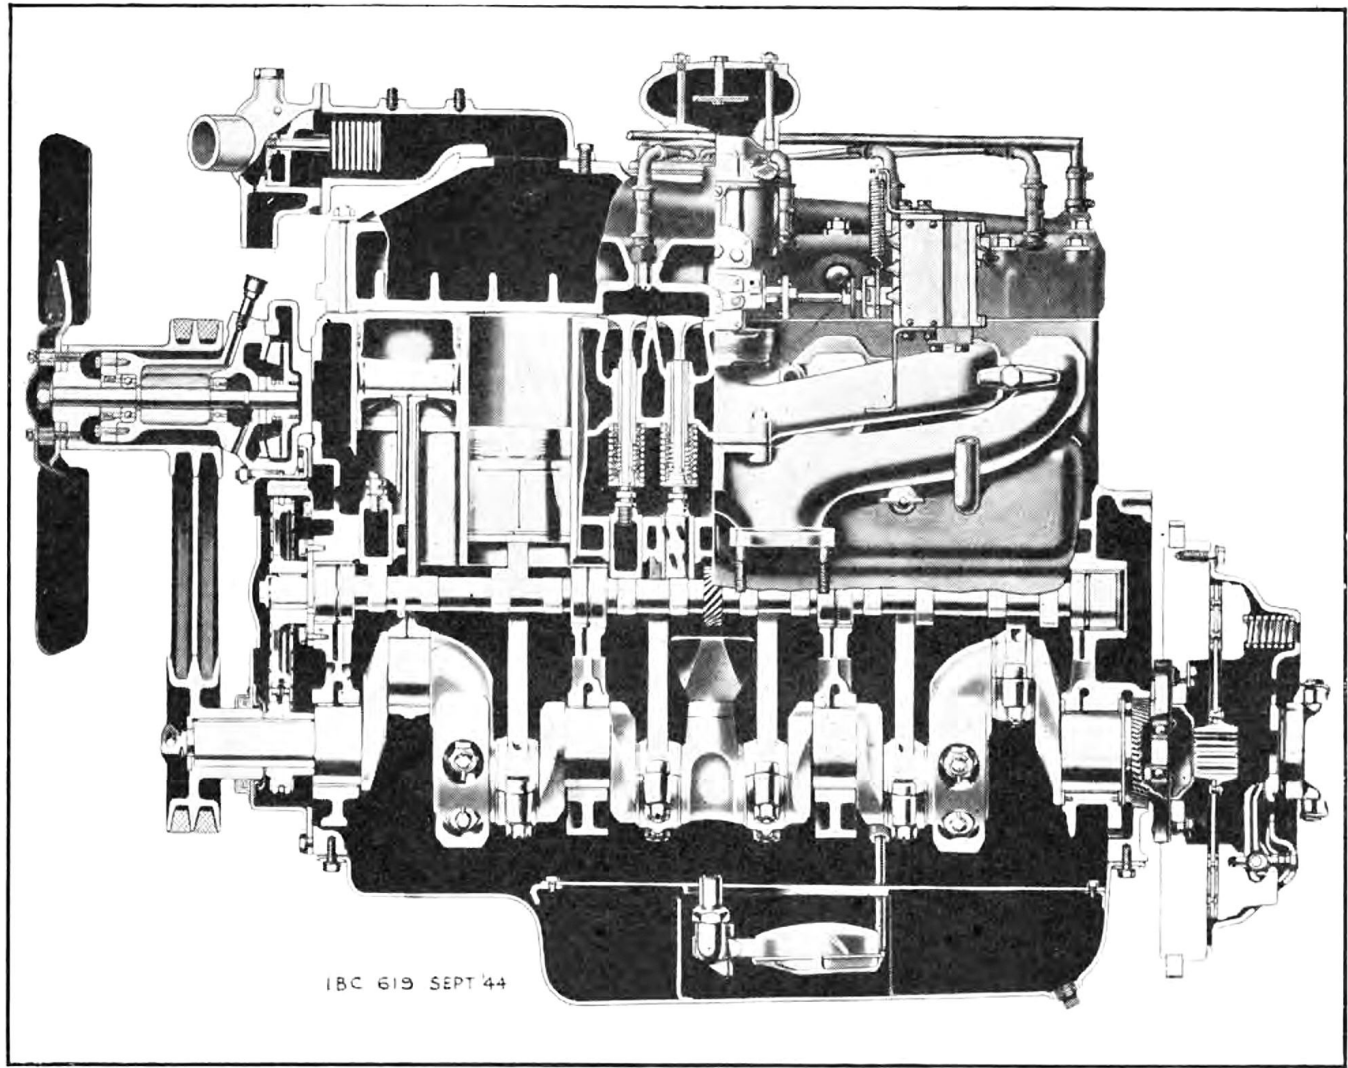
ENGINE—LONGITUDINAL SECTION.
